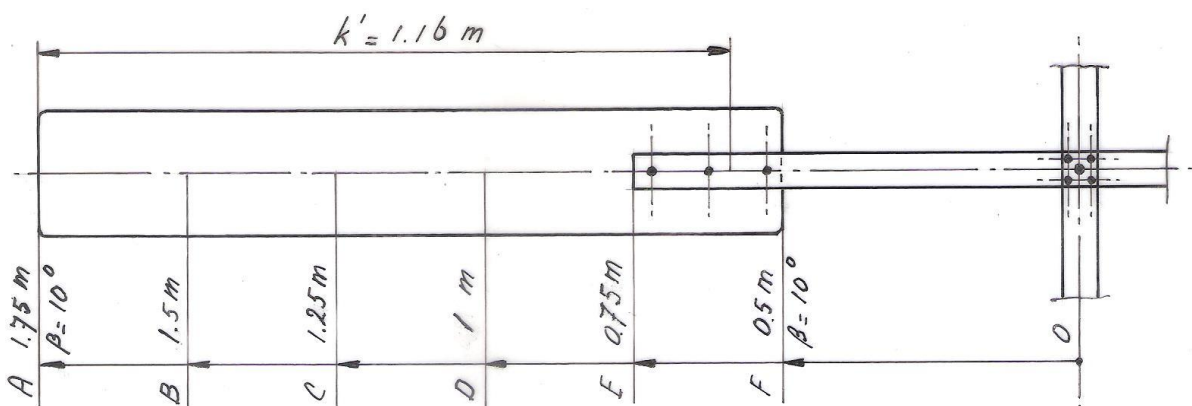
Sketch of a blade of the VIRYA-3.5 rotor
